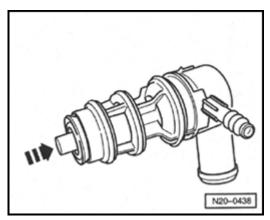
Checking Switch-Over Valve Courtesy of VOLKSWAGEN UNITED STATES, INC.
